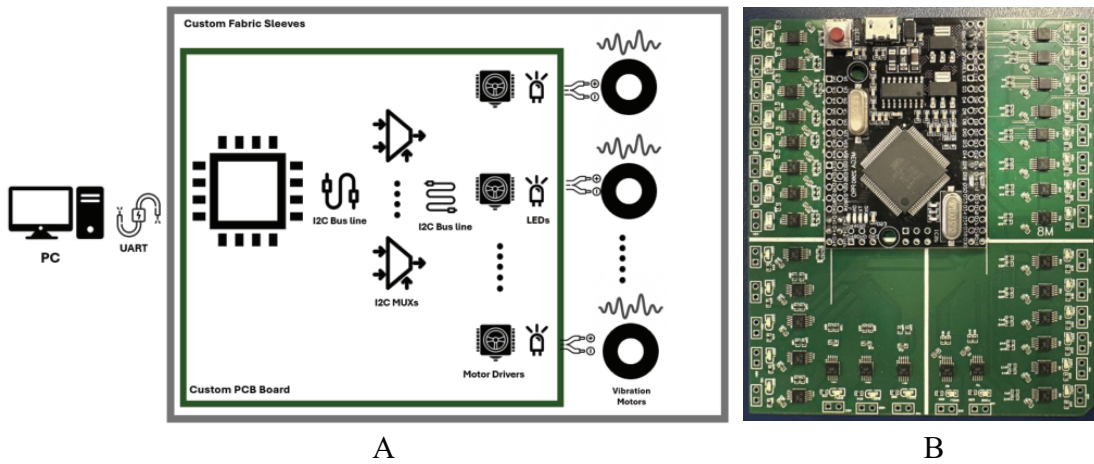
(A) Schematic of PCB (B) actual picture of PCB.
